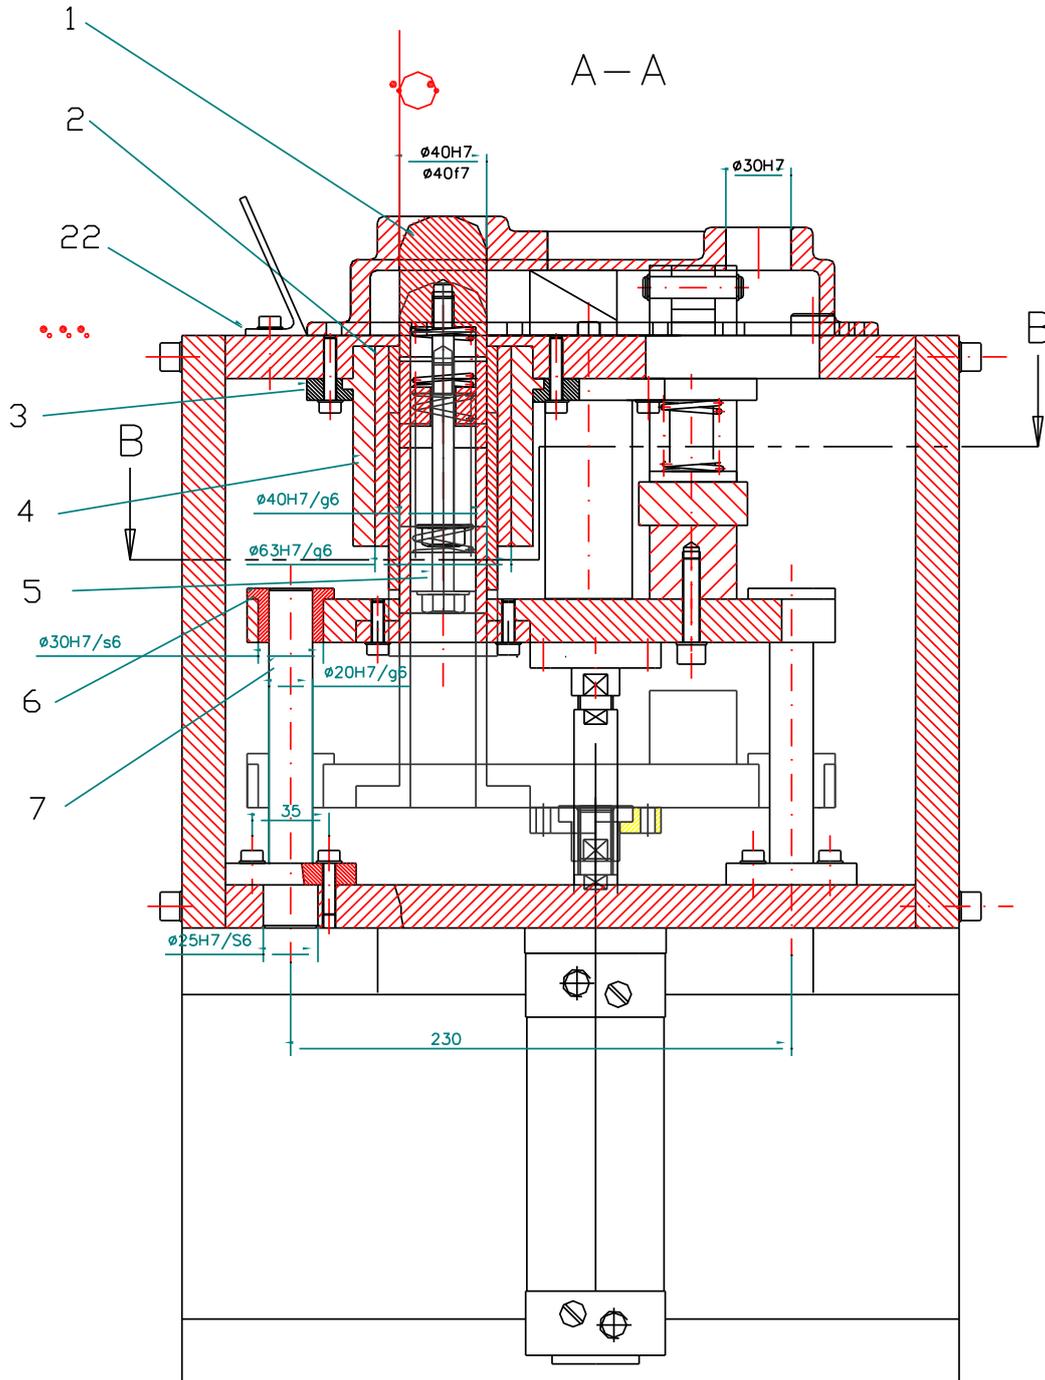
2D Model of the mechanized operated guidance and fixing device with levers assembly. A-A Section
